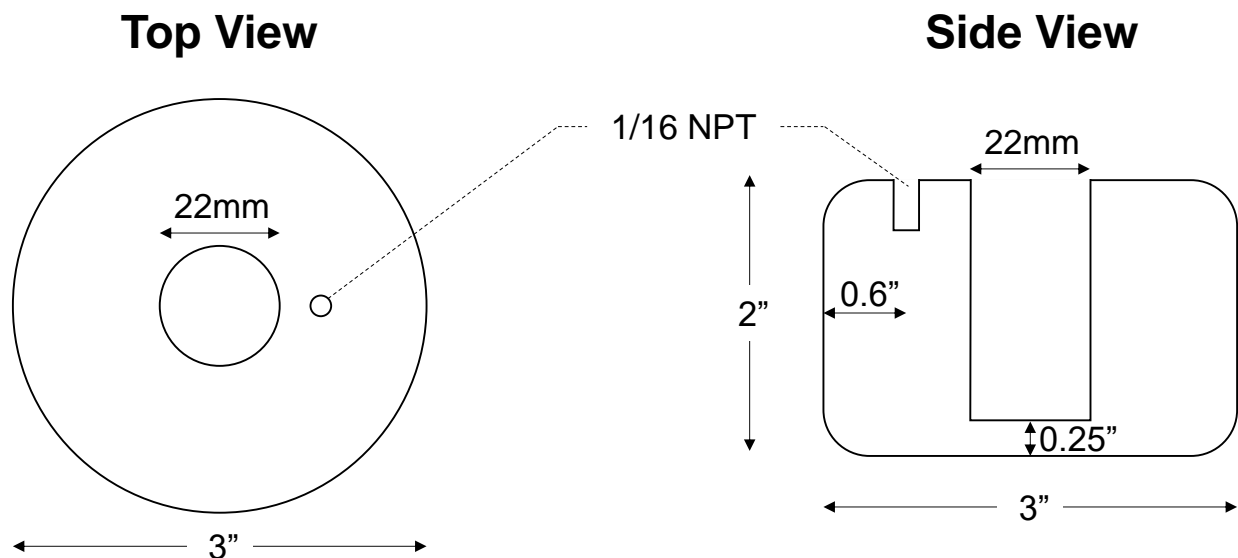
6061 Aluminum Block Cut and Machined to Size
